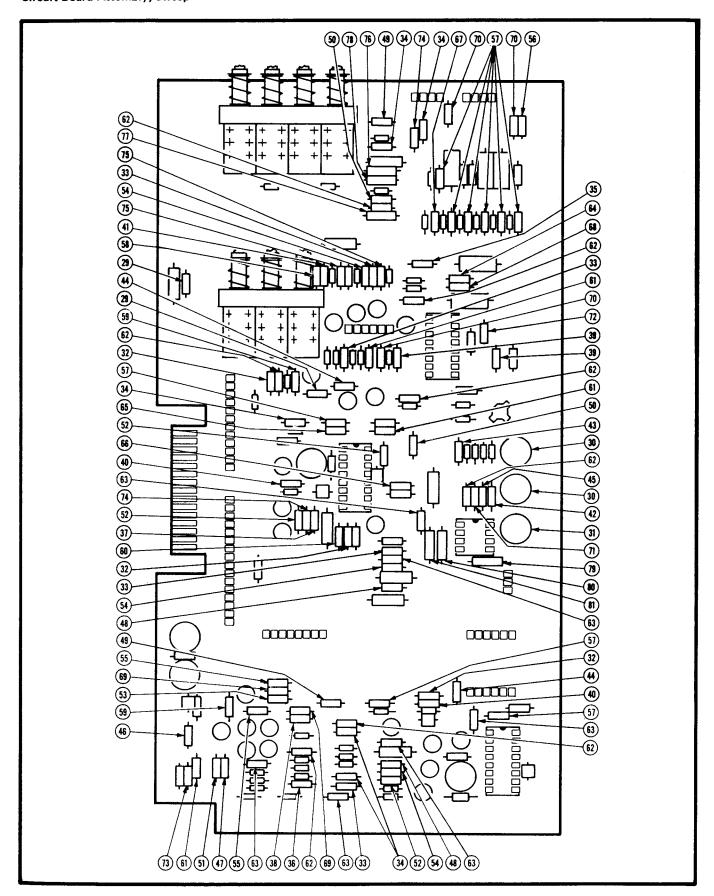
Circuit Board Assembly, Sweep (Sheet 2 of 3).
